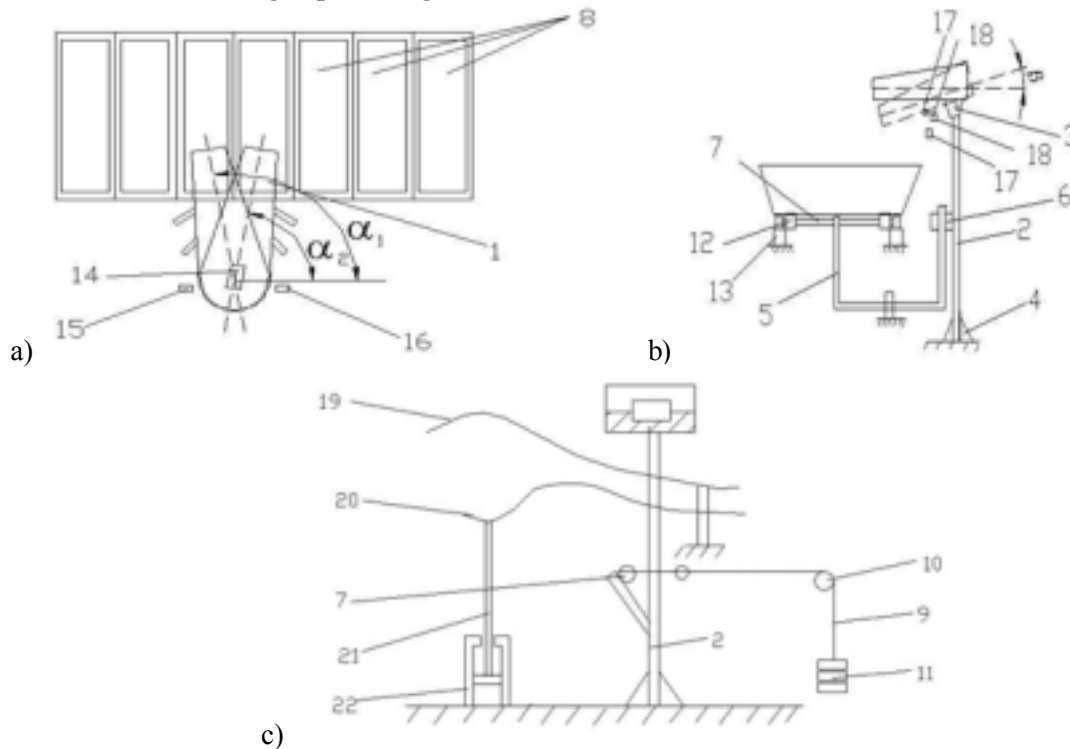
Device for dispensing liquid magnesium into molds: a) -view from above, b) - side view, c) - front view.
